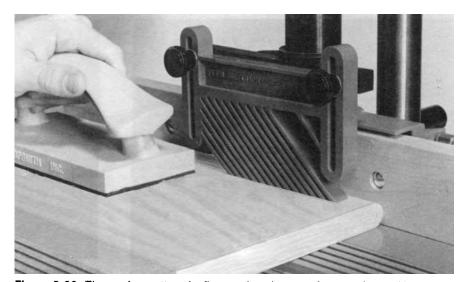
The nosing cutter of a flute and nosing set of cutters is used here to round off the edge of a workpiece.
